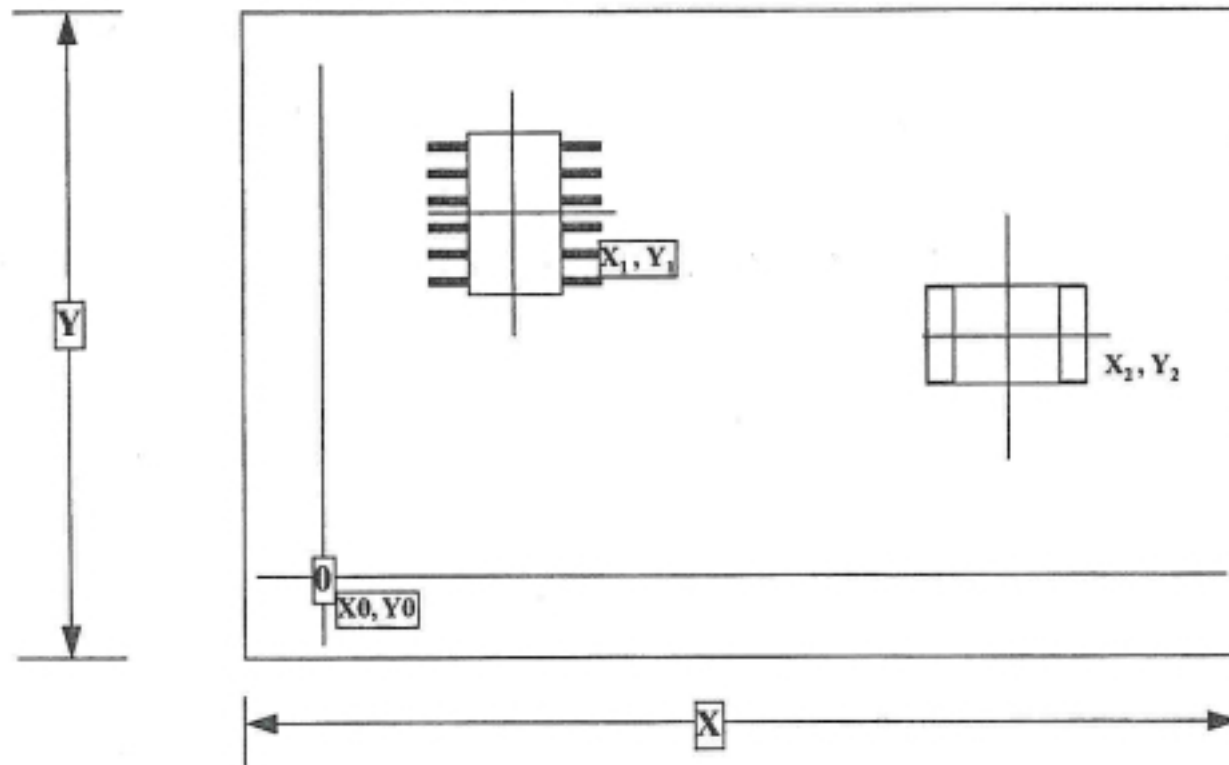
Examples of dimensions and coordinates that need to be programmed in a pick-and-place machine.
